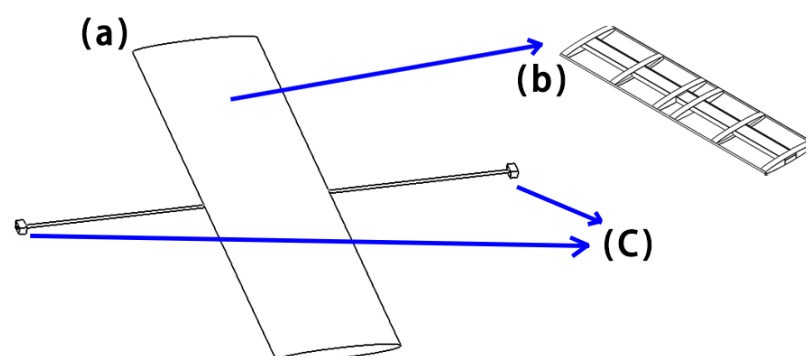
(a) Wing and clump weights assembly. (b) The inner structure of the wing. (c) Clump weights.
